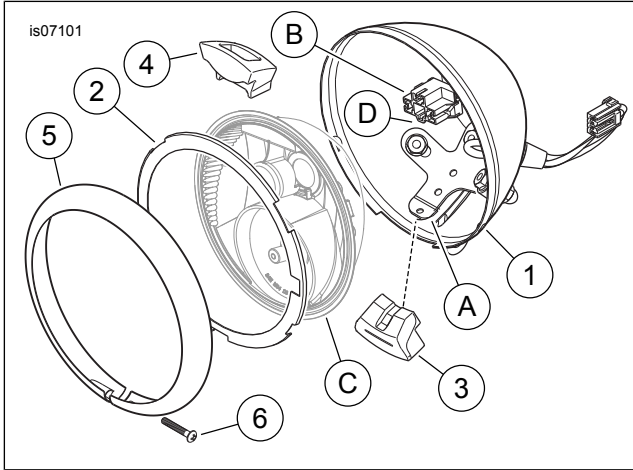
Service Parts, 5-3/4 Inch Headlamp Housing
